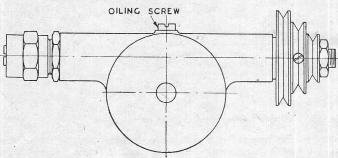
Milling and drilling spindle with push-in collet chuck and offset clamping pad
